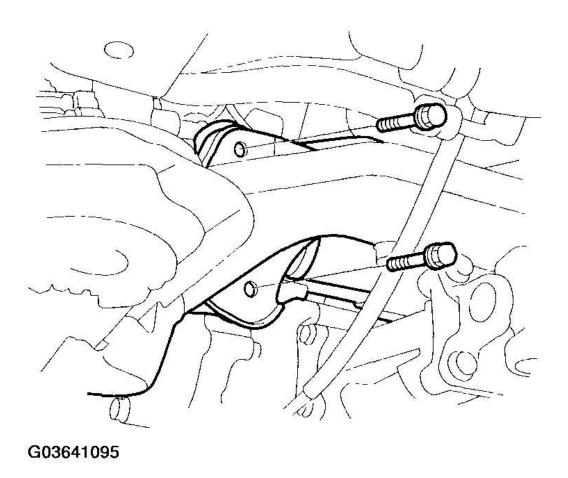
Removing Two 10 mm Flange Bolts From Left Side Of Gearbox Courtesy of AMERICAN HONDA MOTOR CO., INC.
